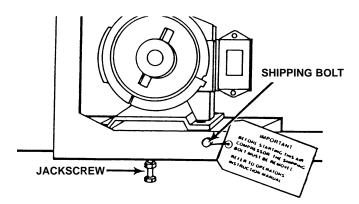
SHIPPING BOLT LOCATION
